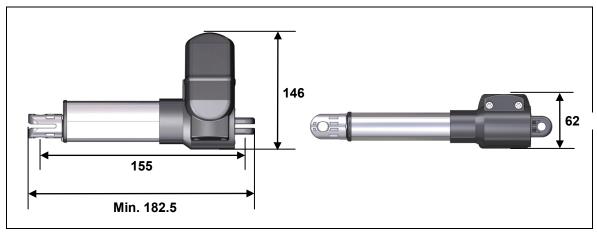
Dimensions of ALPHADRIVE drive stroke pipe clevis (slot 5 mm) (in mm), Minimum installation dimension: 155 mm
